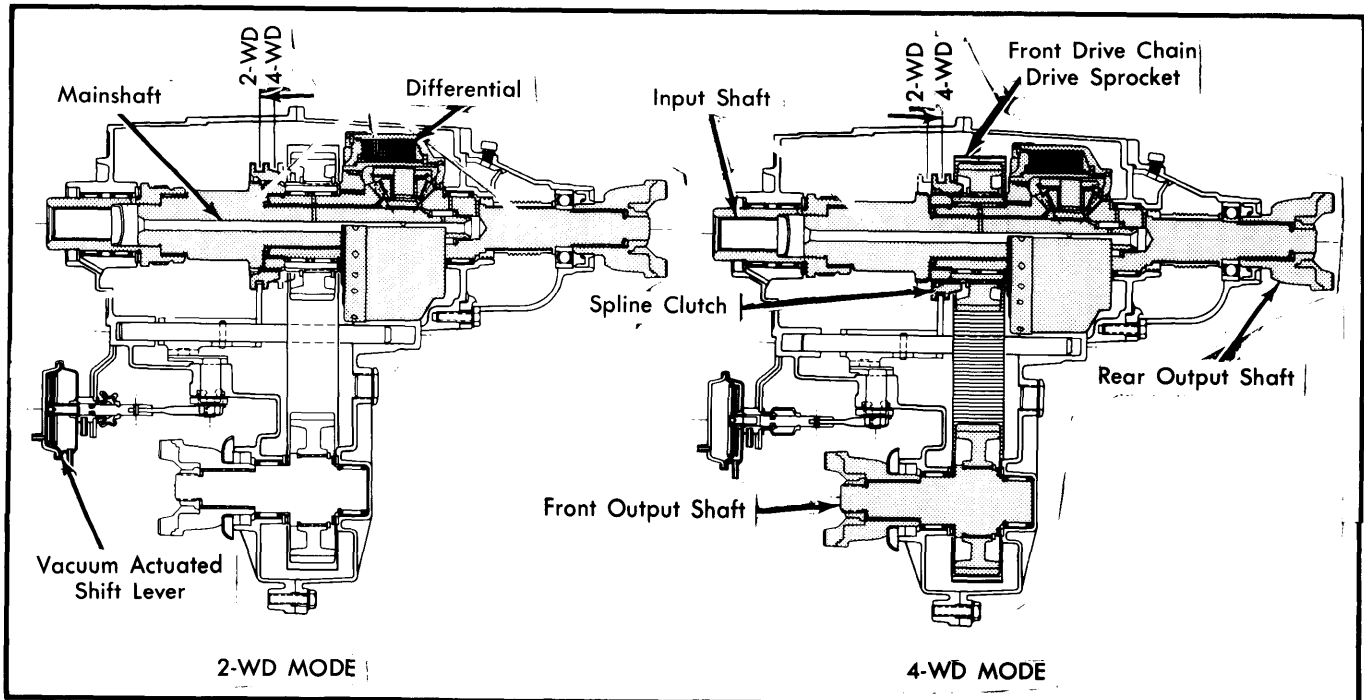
Sectional View of Eagle Select Drive Transfer Case
